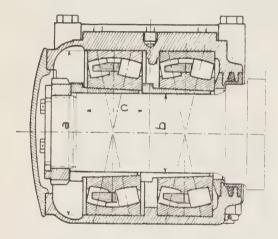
S. K. F. roller bearing axle box of the outside type with double lines of rollers, held on the journal by split conical bush.
